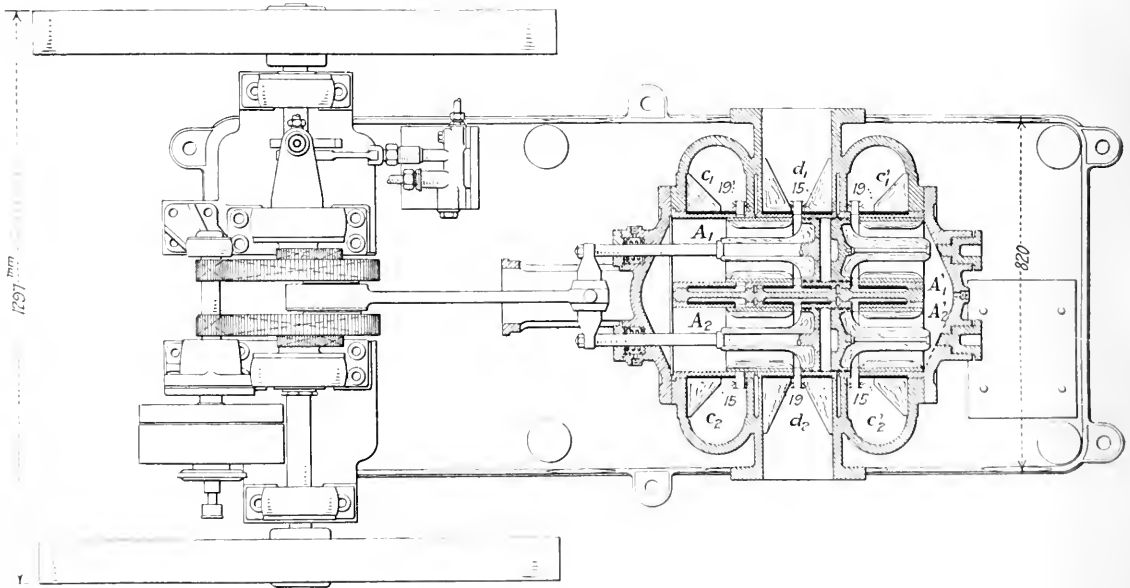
"WATTESS" COMPRESSOR OF THE LEBLANC REFRIGERATING MACHINE
